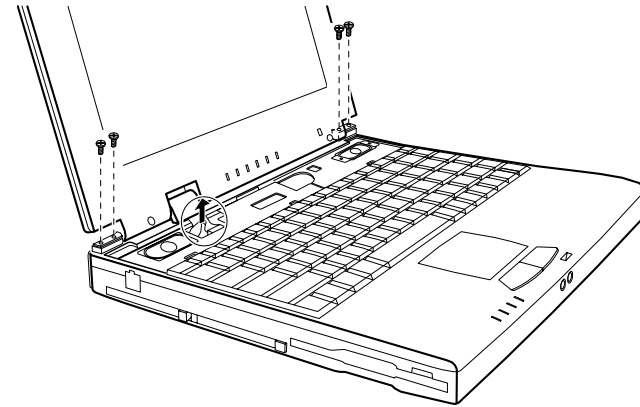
Removing the Screws and Unplugging the LCD Cable Connectors
